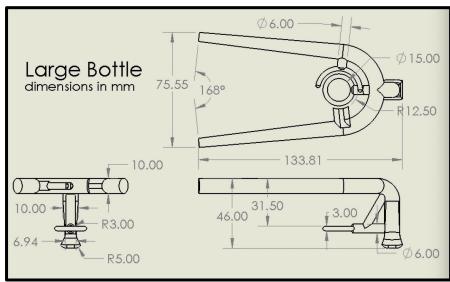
Dimensioned SolidWorks drawings of prototype featuring the platform for stability
